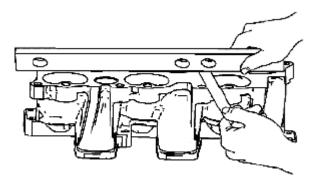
Inspecting Lower Intake Manifold Sealing Surfaces For Warpage
